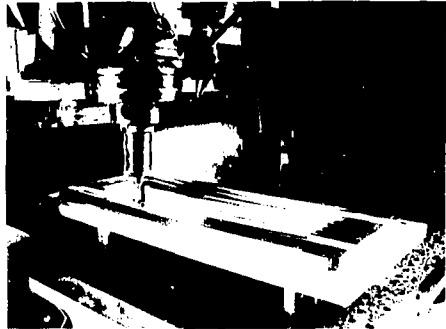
End Milling a Long-Radius, Cylindrically-Curved Surface in a Continuous-Path, Three-Axis, CNC Milling Machine
